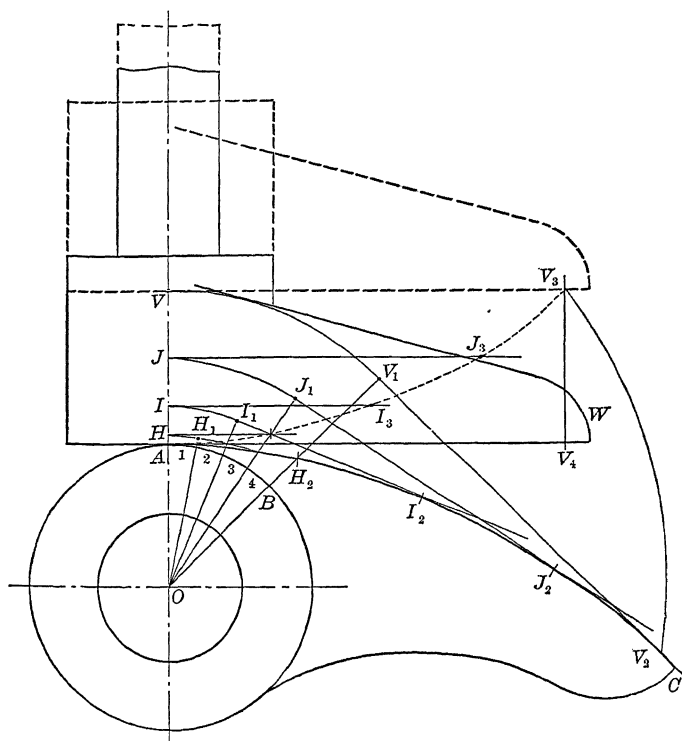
PROBLEM 12, TOE AND WIPER CAM
